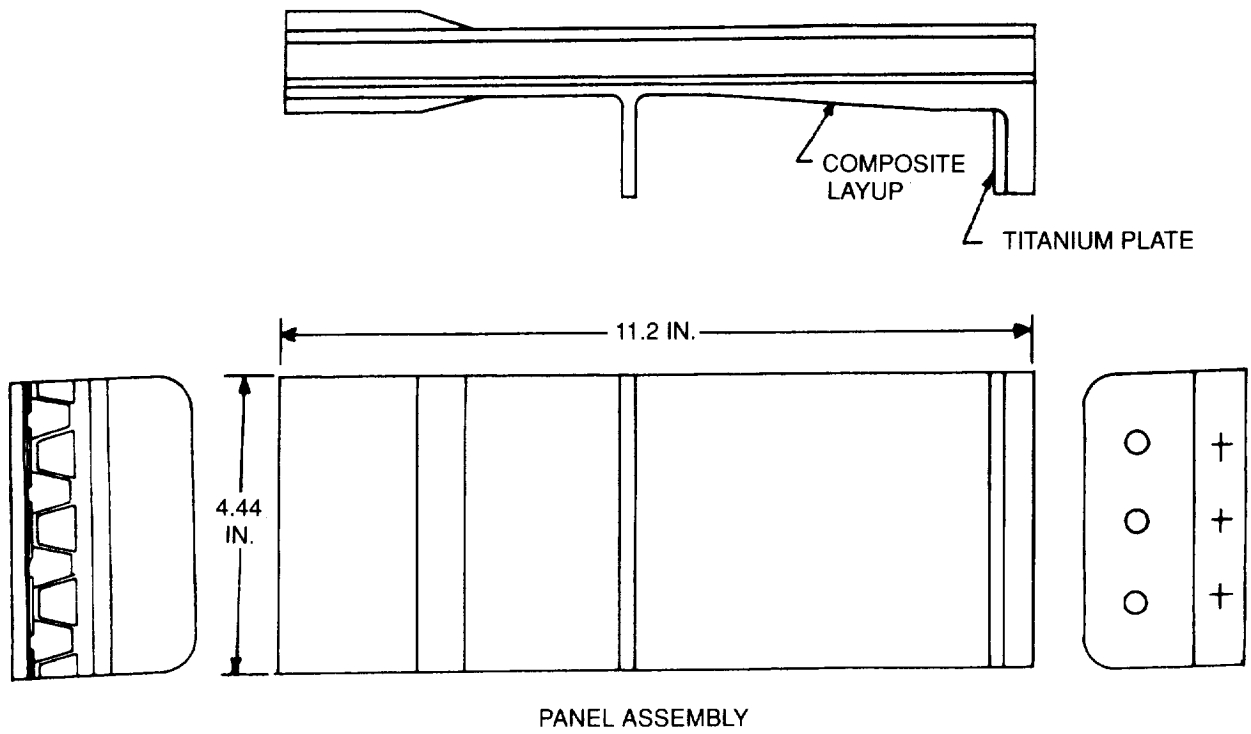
MODIFIED THREE-RIB JOINT TEST SPECIMEN
